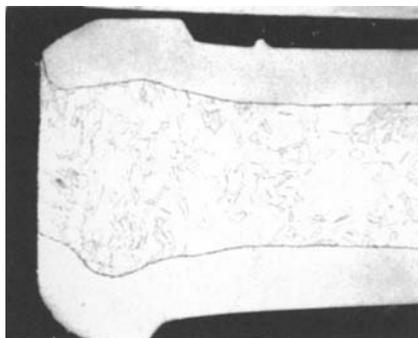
Metallographic cross section of the edge of a cupronickel-clad copper coin.
